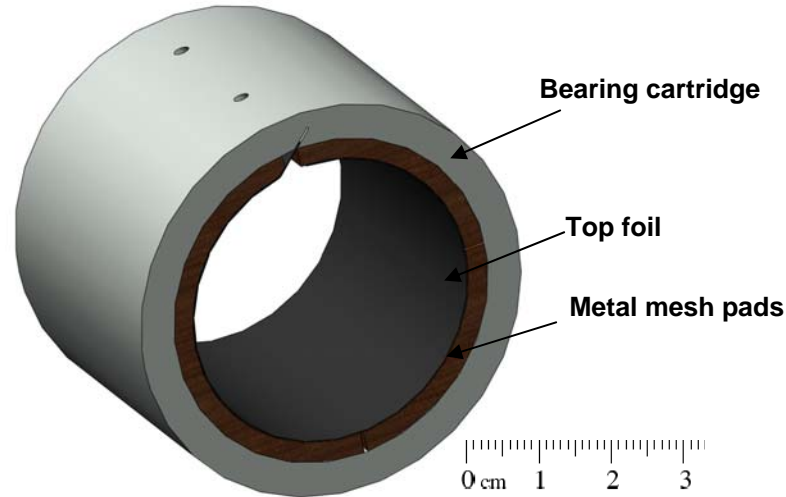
View of a metal mesh foil journal bearing (MMFB).
